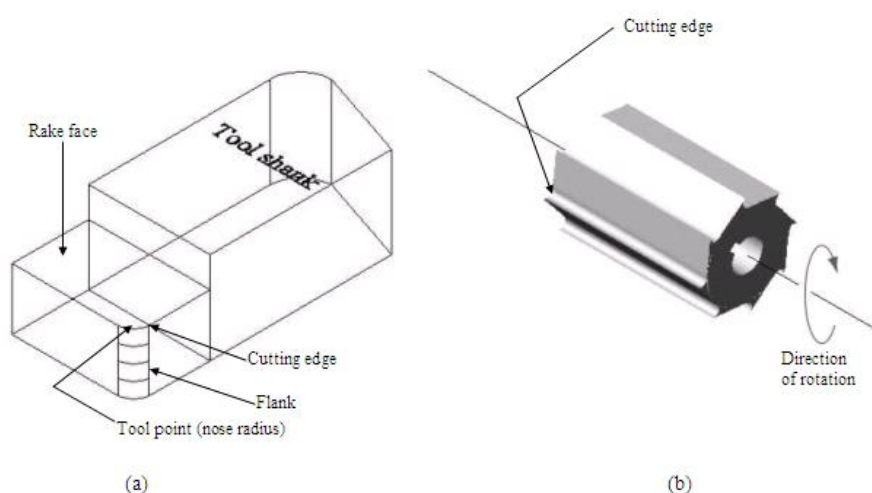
a) A single – point tool showing rake face, flank, and tool point, and b) a helical milling cutter, representative of tools with multiple cutting edges.
